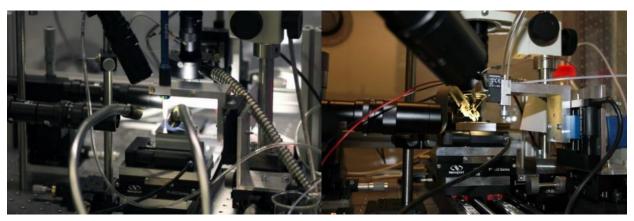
Hybrid assembly test station. Left: pneumatic dispenser installed in the front. Right: ultra-thin die handling tool integrated in the front.
